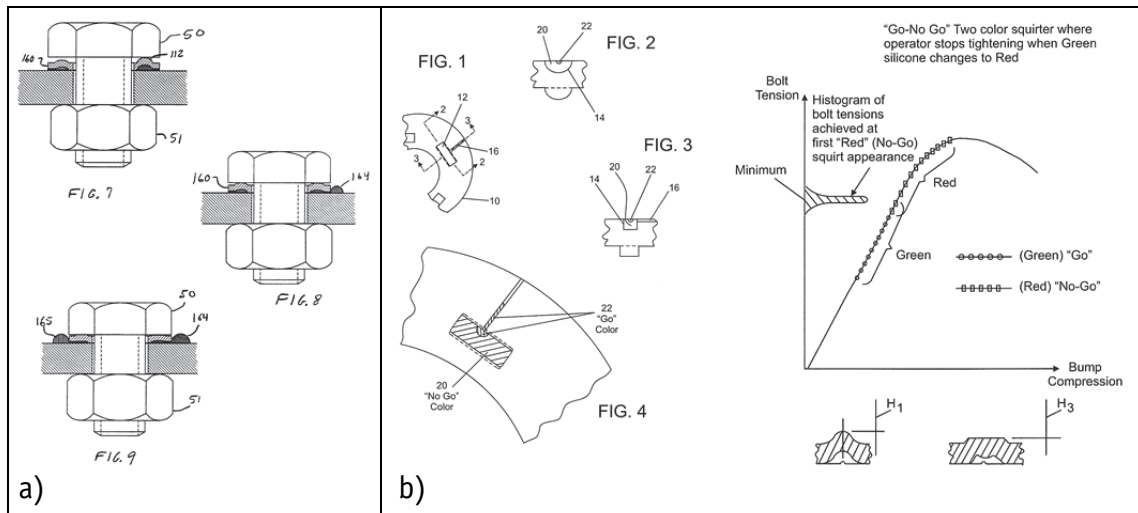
(a) Direct tension indicator washer (US5667346 A) [Sh96], (b) Load indicating fastener and method of manufacture (US7635243 B2) [TSS06]
